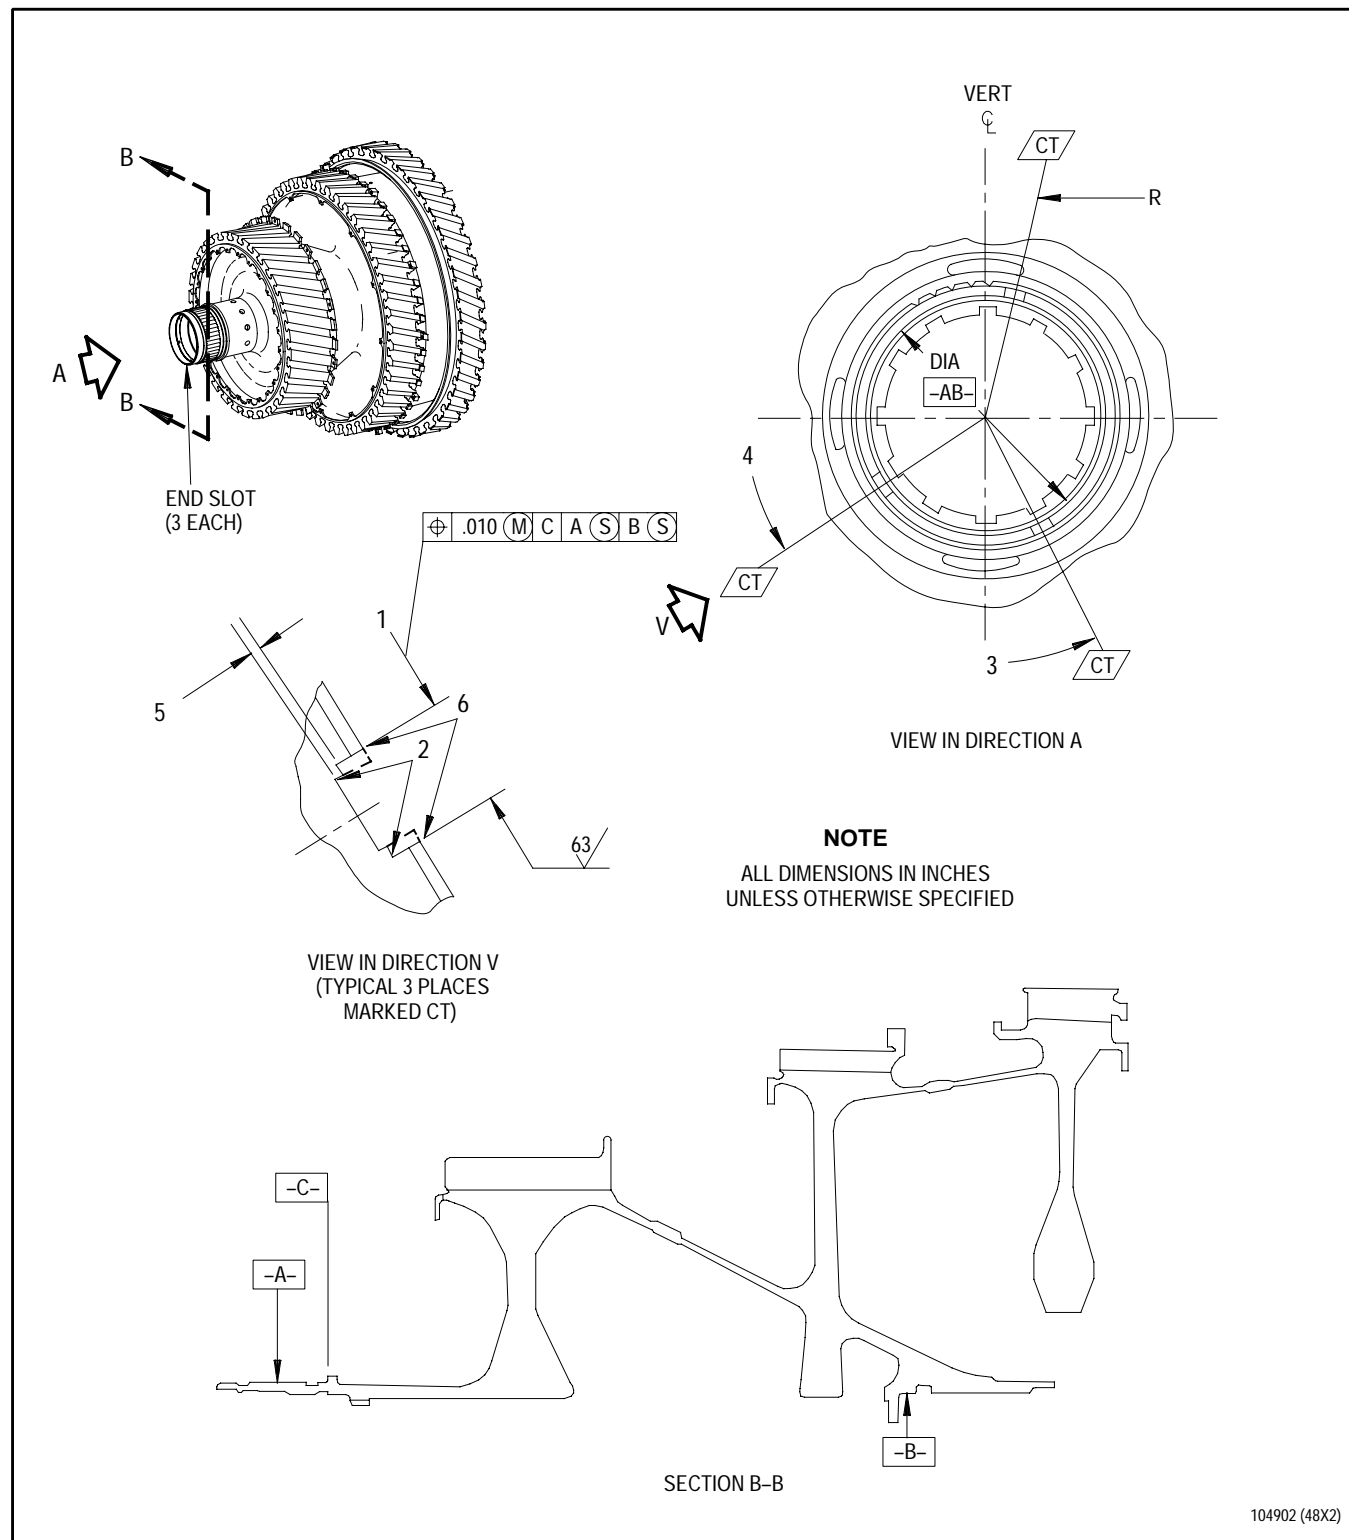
Front Compressor Drum Rotor Disk Assembly-Repair of Slots (Three Each)
